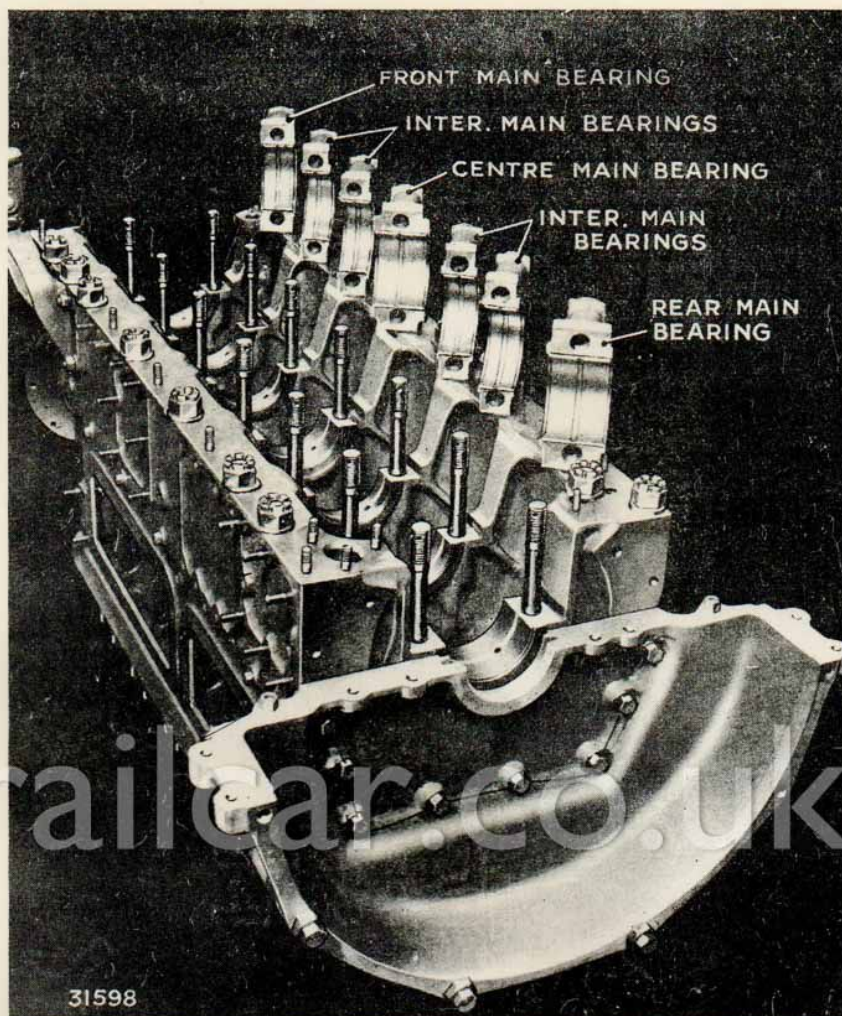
ENGINE BLOCK AND MAIN BEARINGS.
